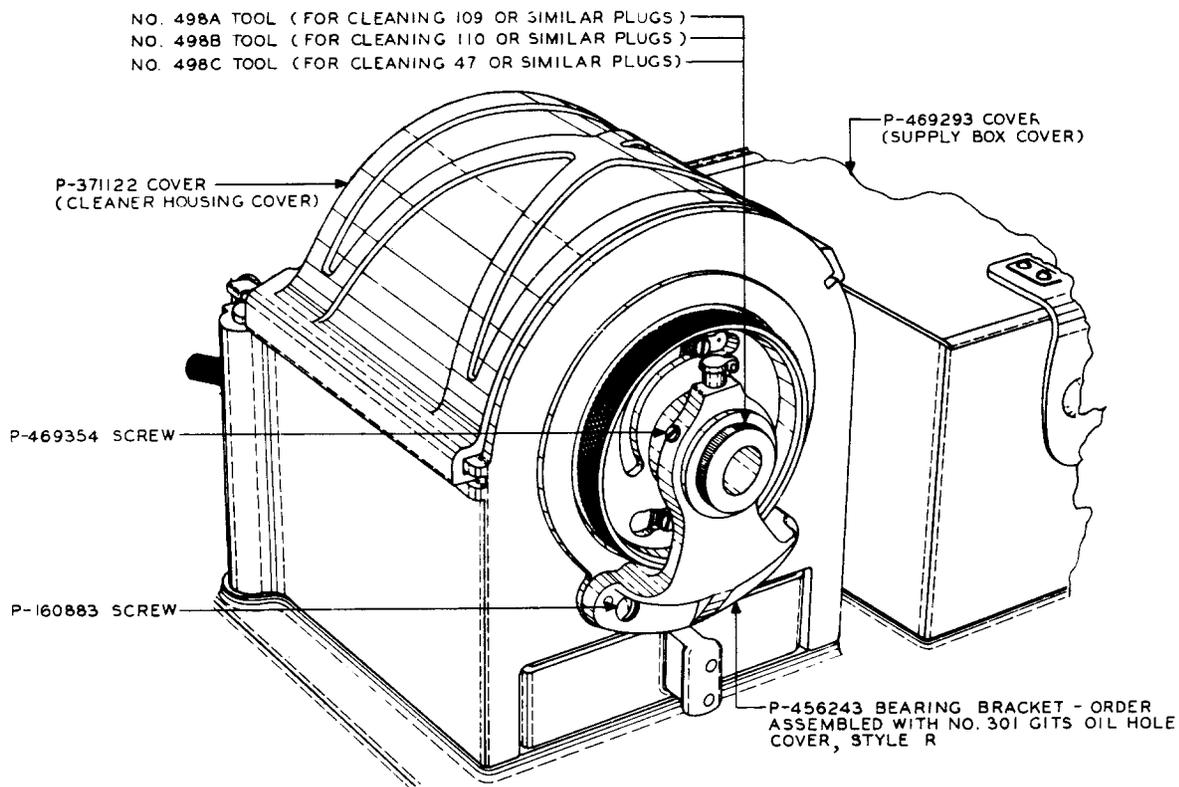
Cleaner Housing Cover, Supply Box Cover, Bearing Bracket and Associated Parts, and 498-type Tool
